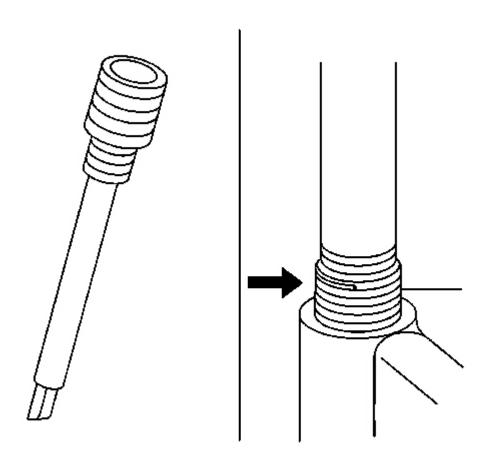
Installing Thread Insert Courtesy of GENERAL MOTORS CORP.
